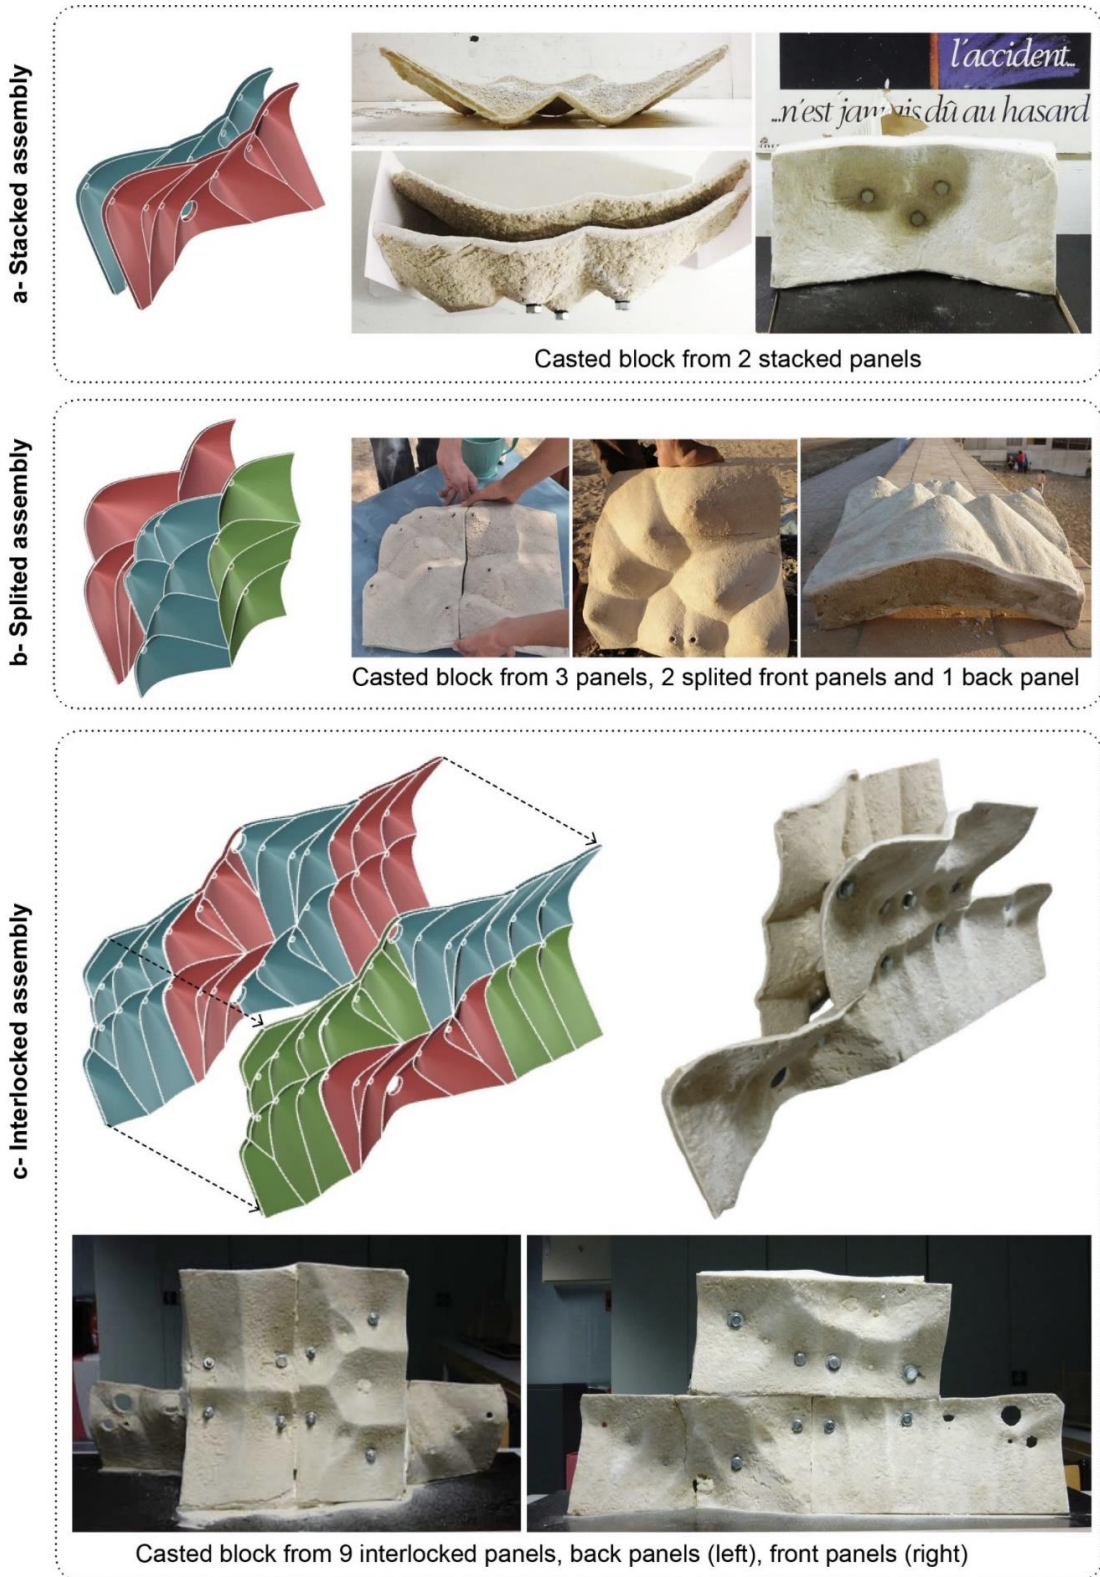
Assembly techniques of sand panels for casting monolithic blocks
